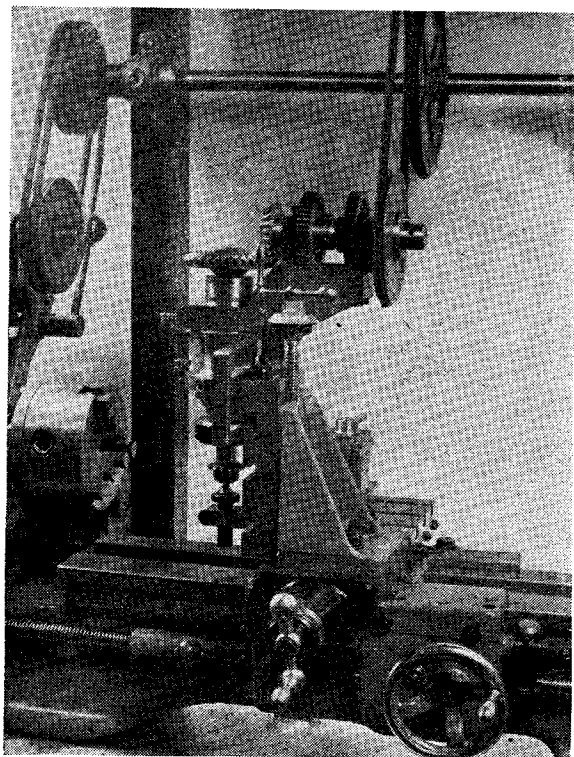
The milling attachment mounted on the Myford M.L.7 lathe
